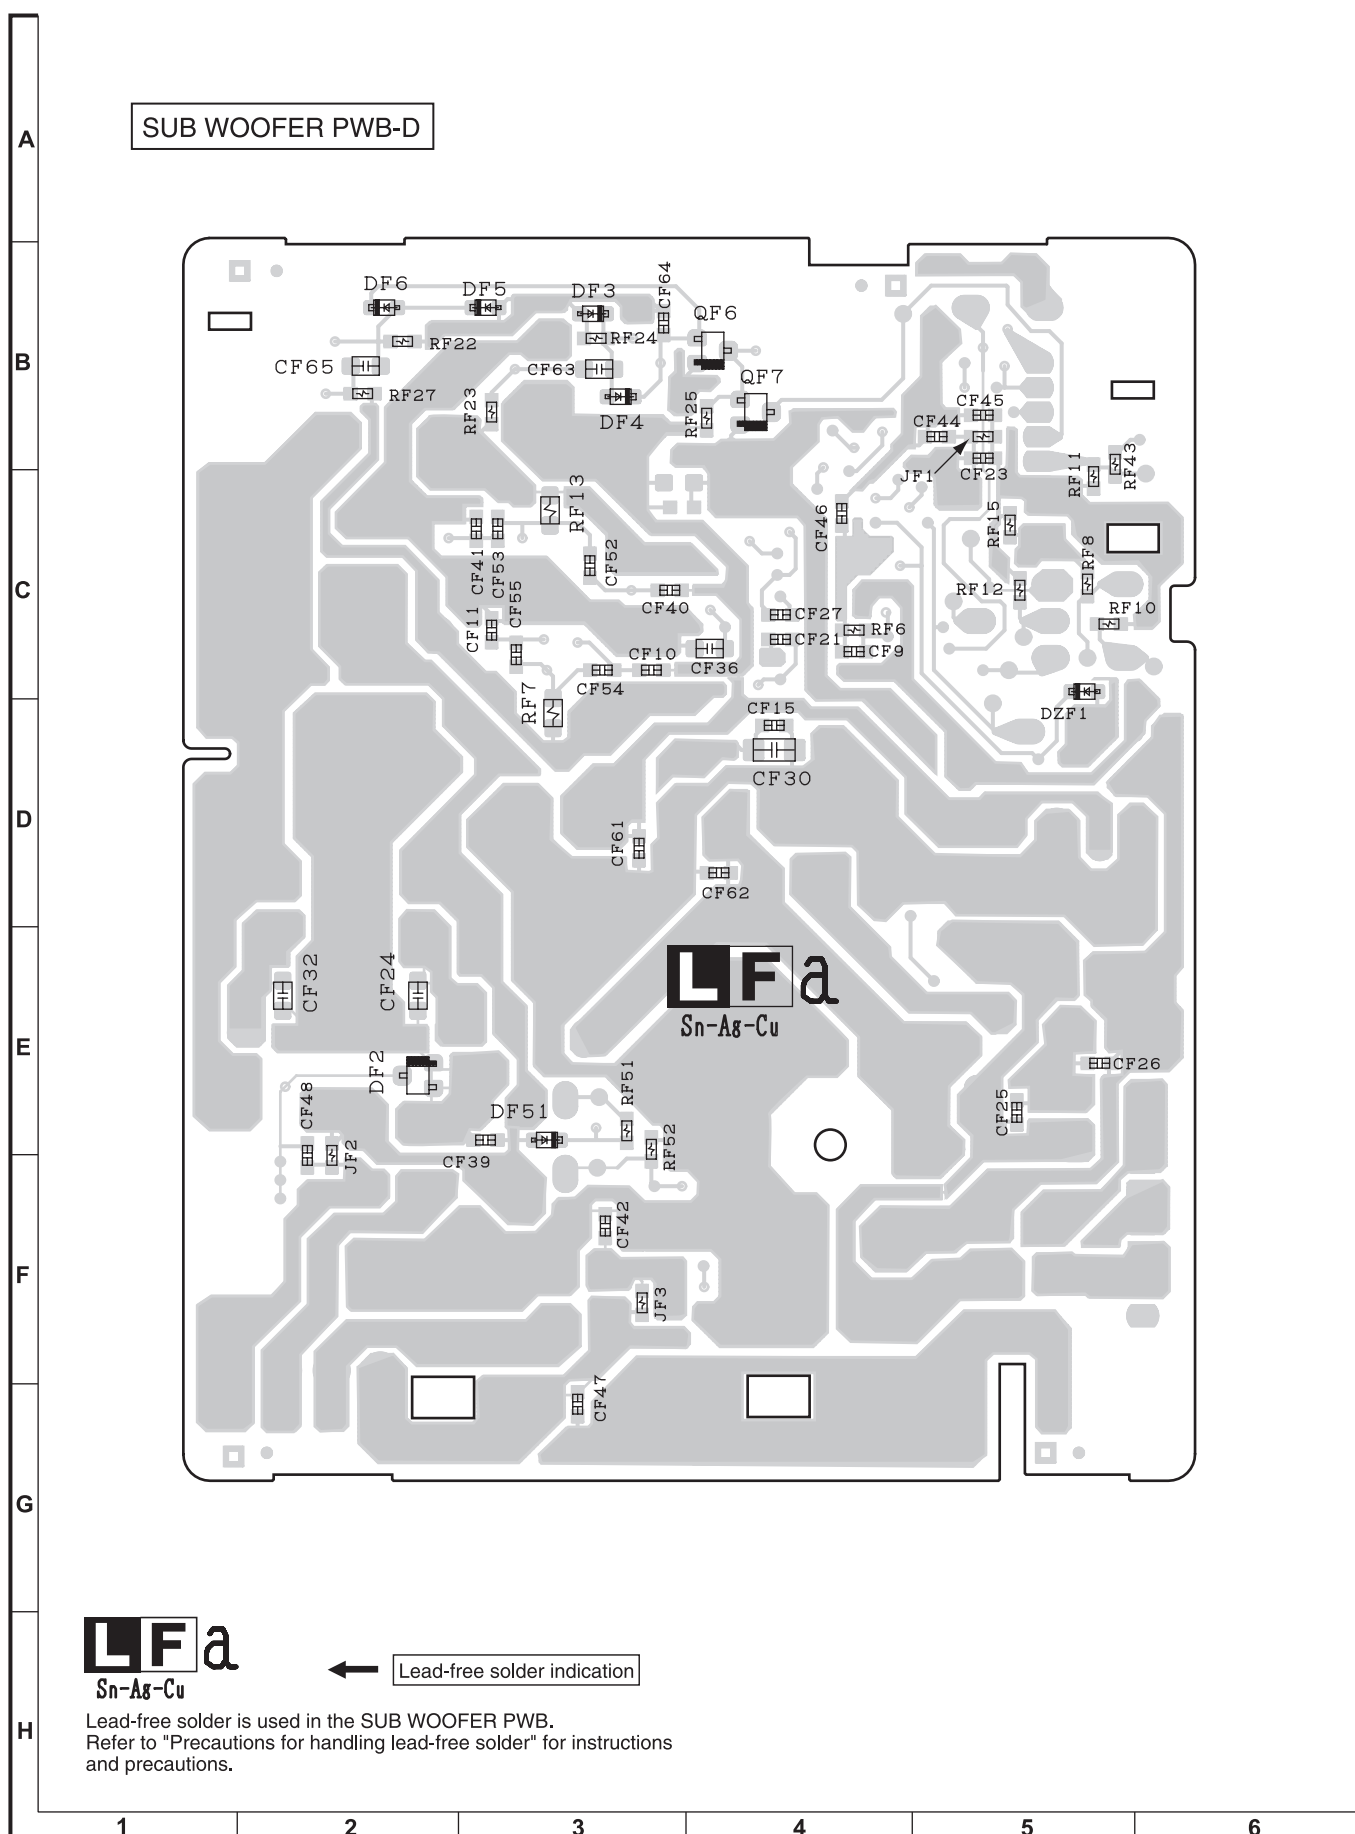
WIRING SIDE OF SUBWOOFER PWB (BOTTOM VIEW) (14/15)
